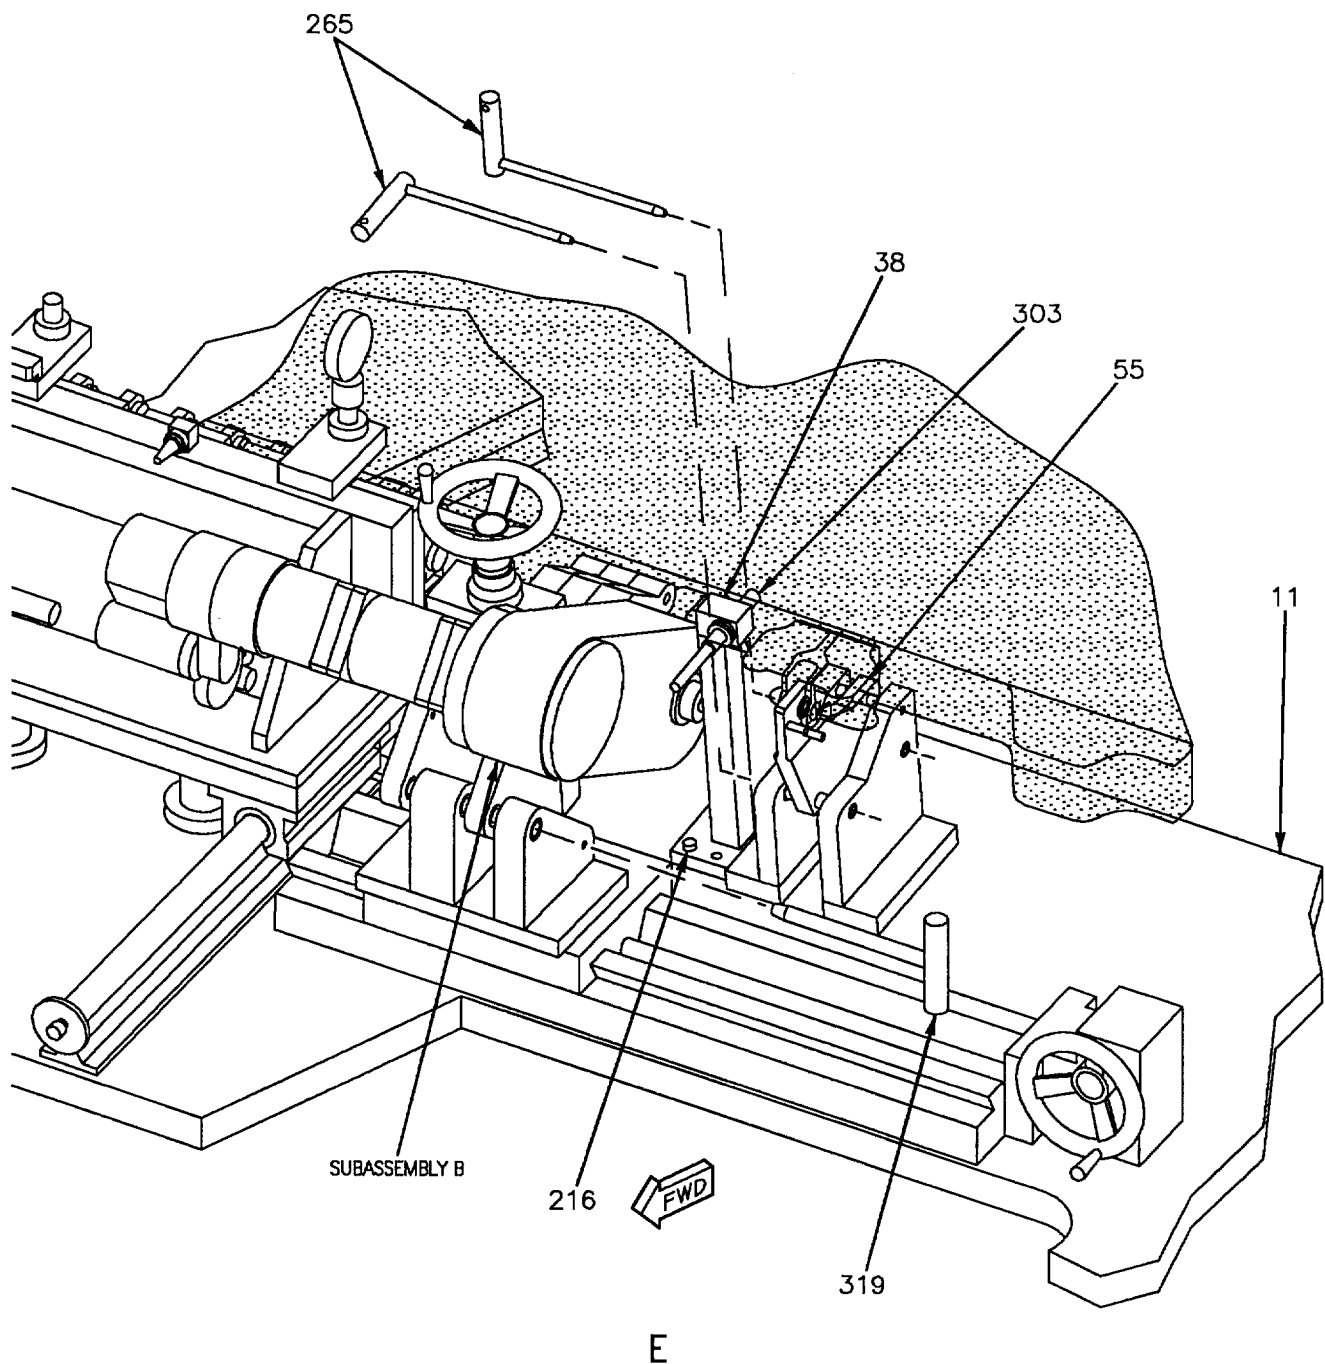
Loading Wing into Drilling Fixture (Sheet 4)
